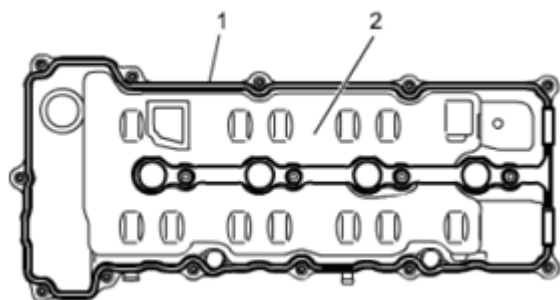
Identifying Cylinder Head Cover Bolts
